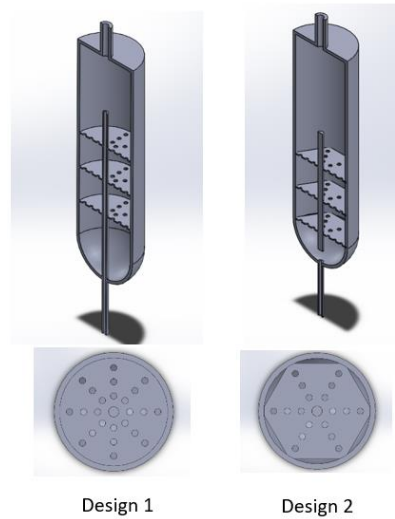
Cross-sectional view and top view of the plate for both designs
